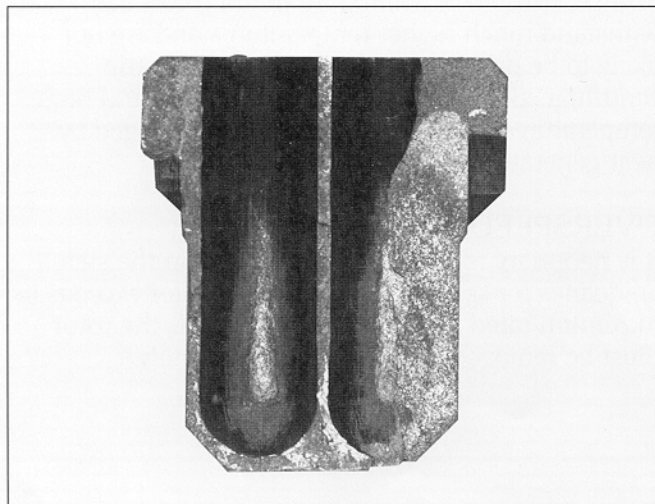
Enlargement of an HS-4 tube cavity showing heavy corrosion.
